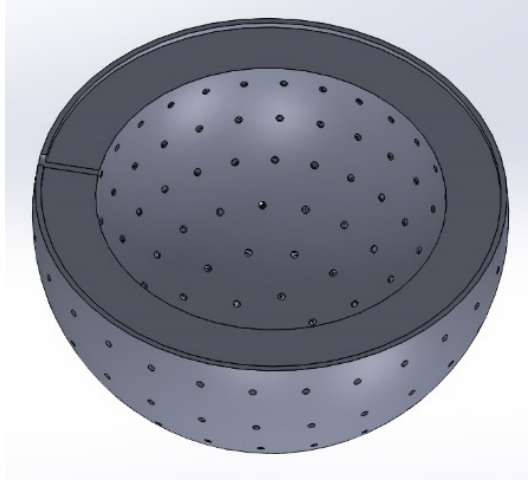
AMM Sphere - Top - CAD - Bottom View
